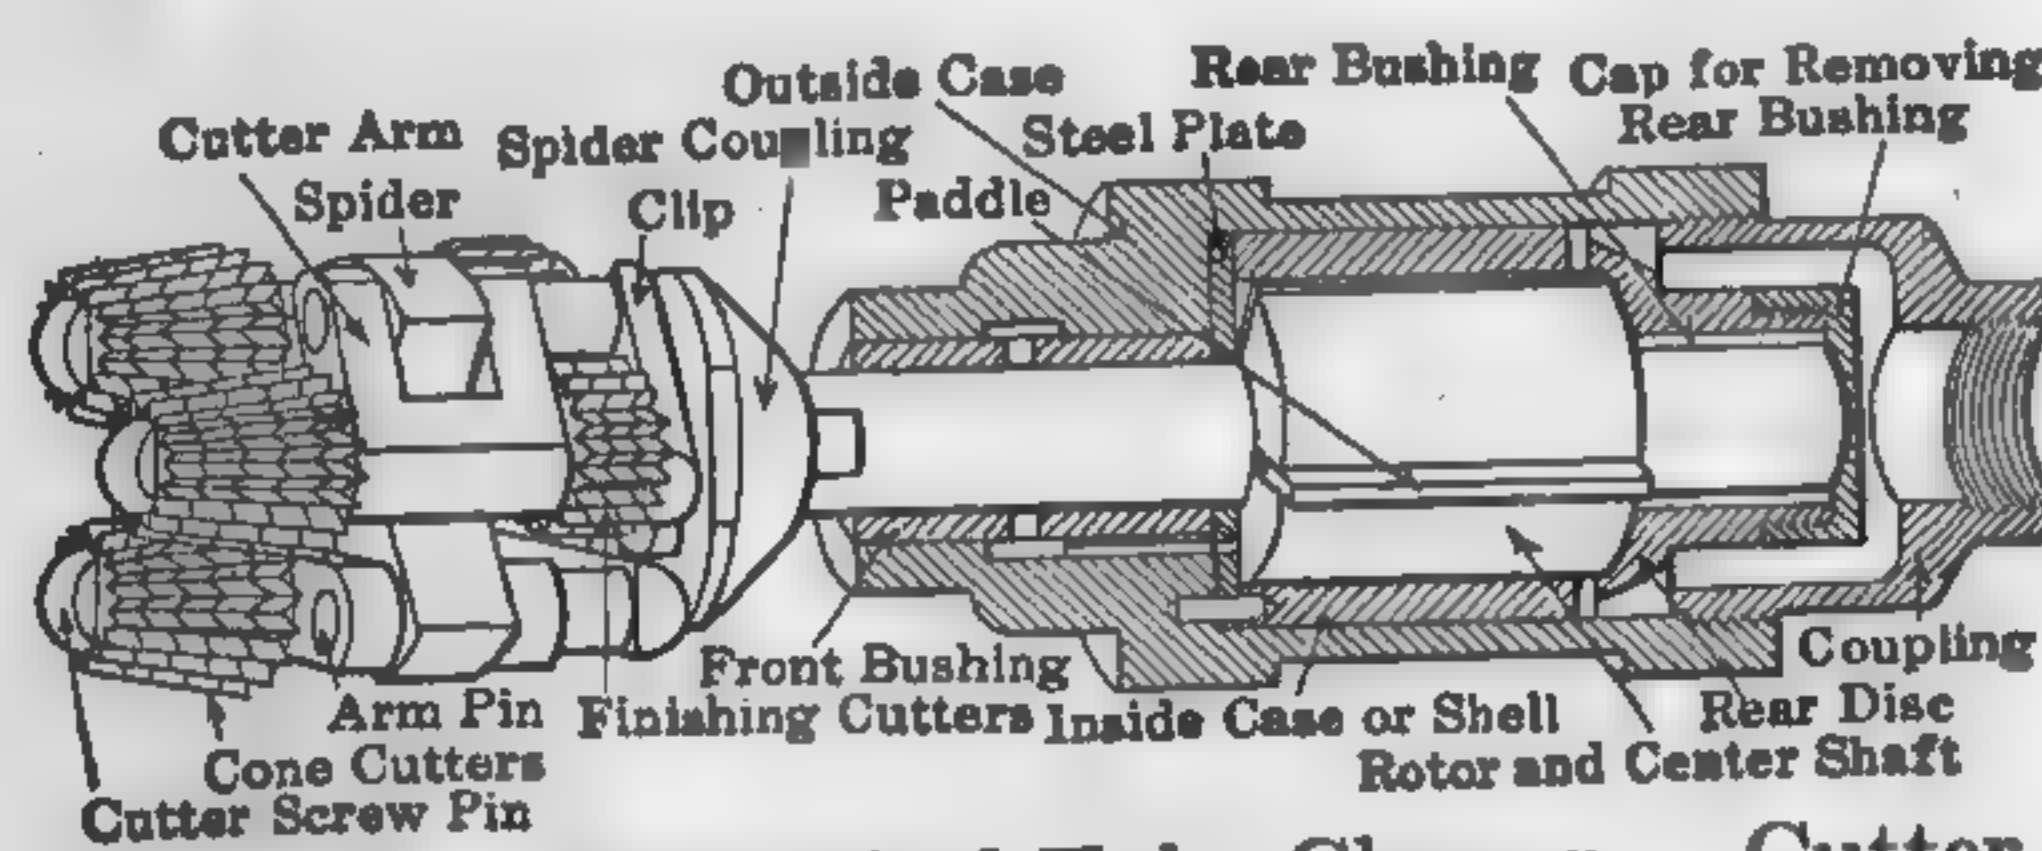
Mechanical Tube Cleaner — Cutter Type.
